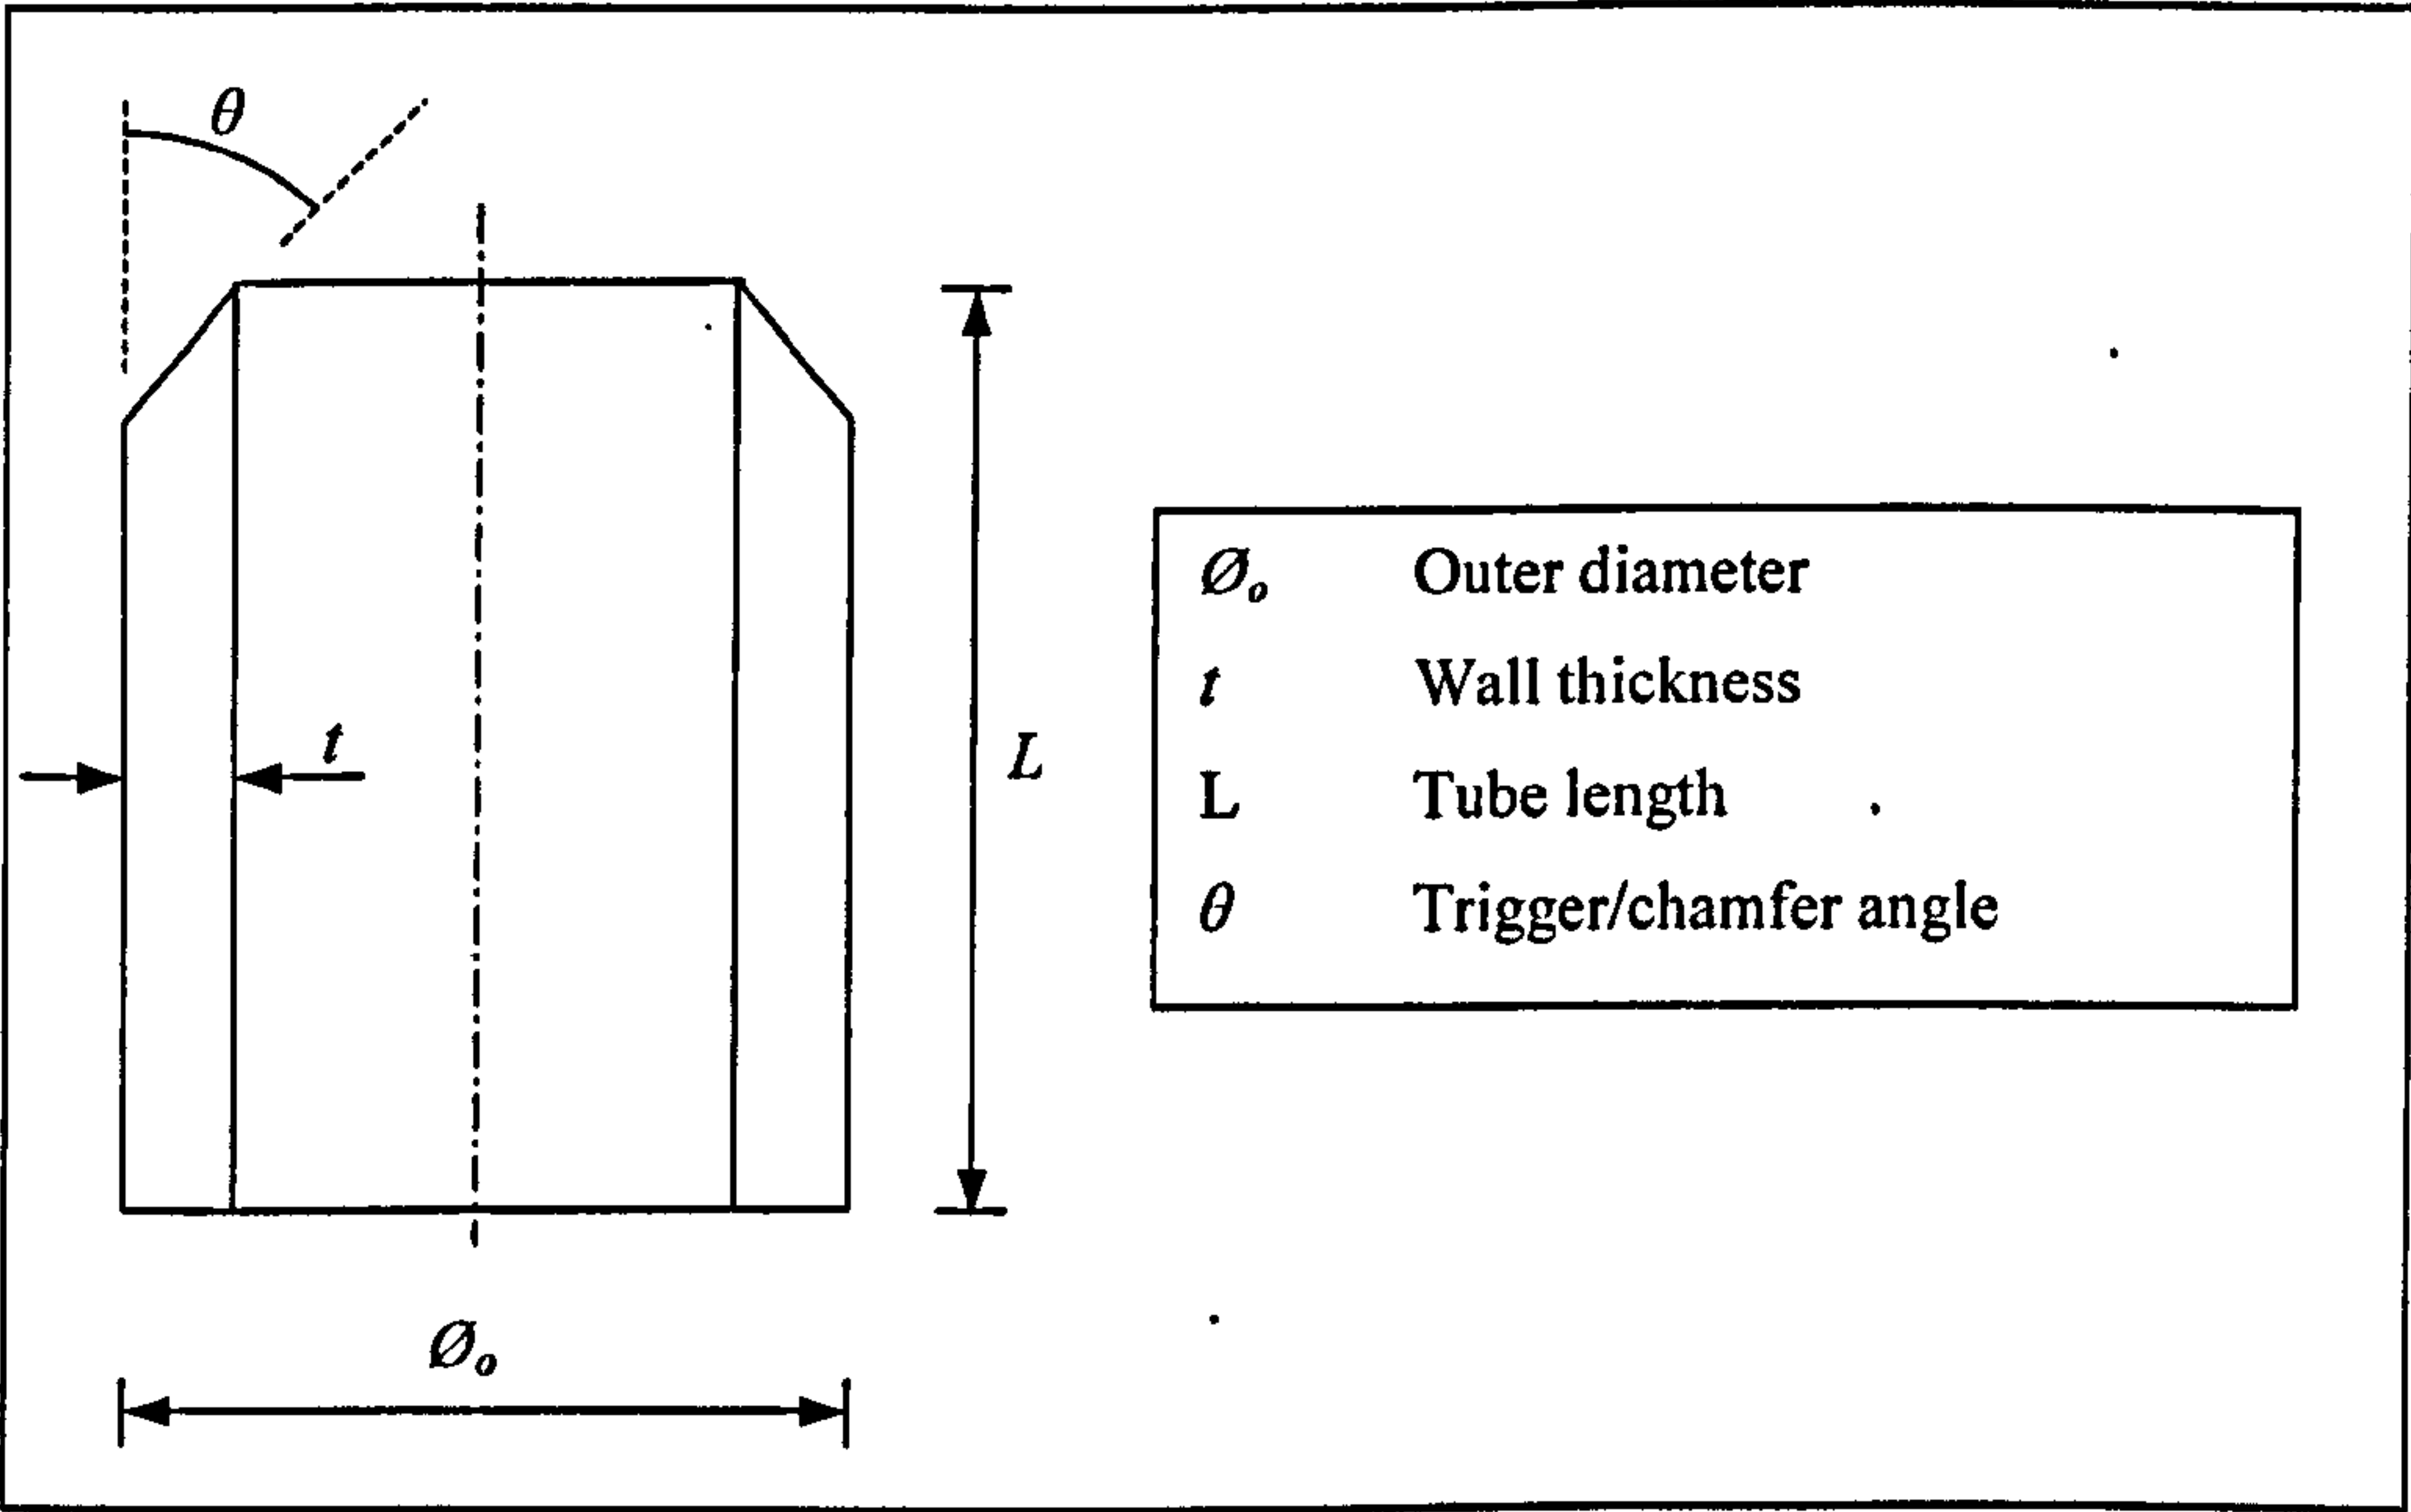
Geometry of Circular Tubes (drawing not to scale)
